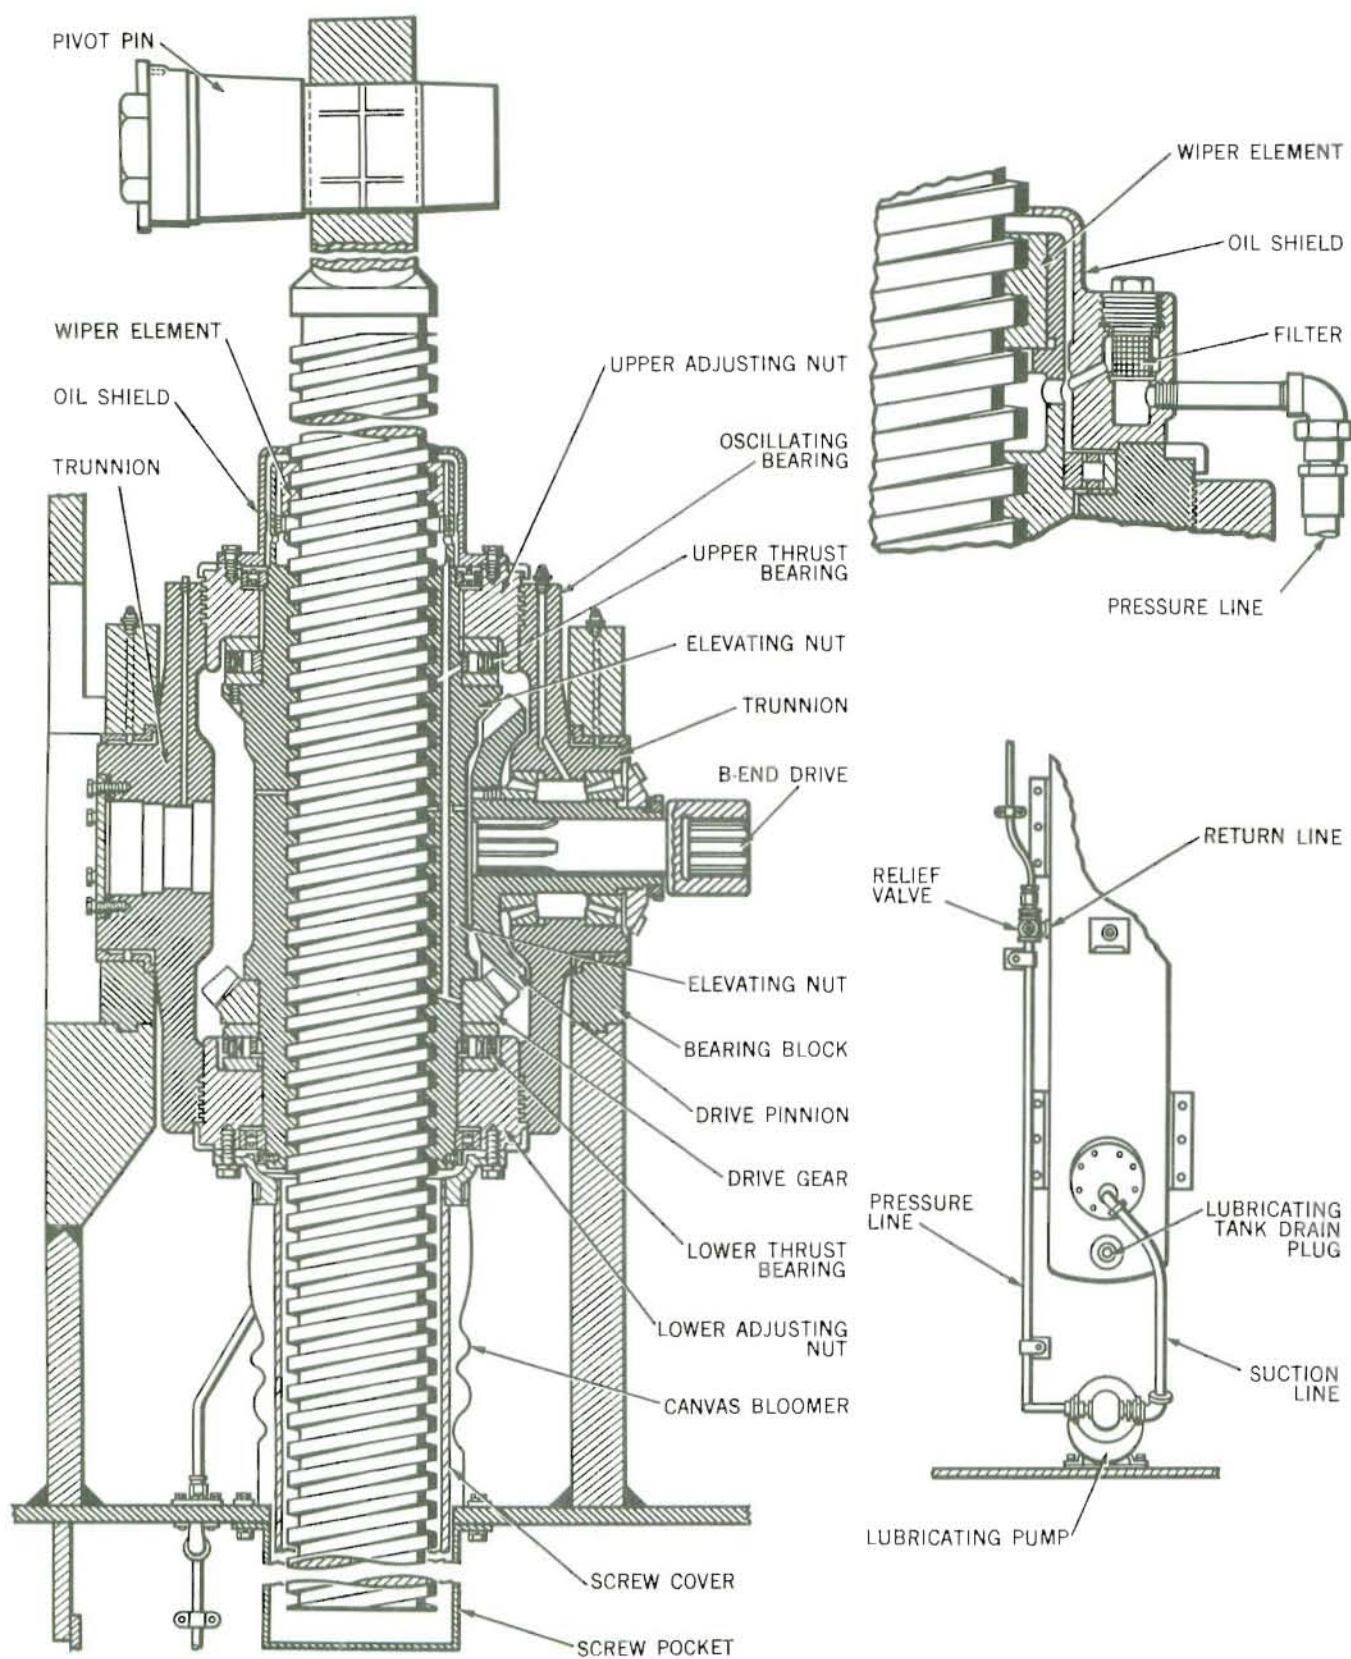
Elevating Gear Oscillating Bearing, Sectional Views
